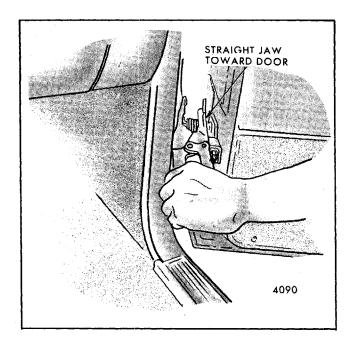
Front Door Hinge Hold-Open Spring Installation Using Tool J-23497 or Equivalent - X Styles
